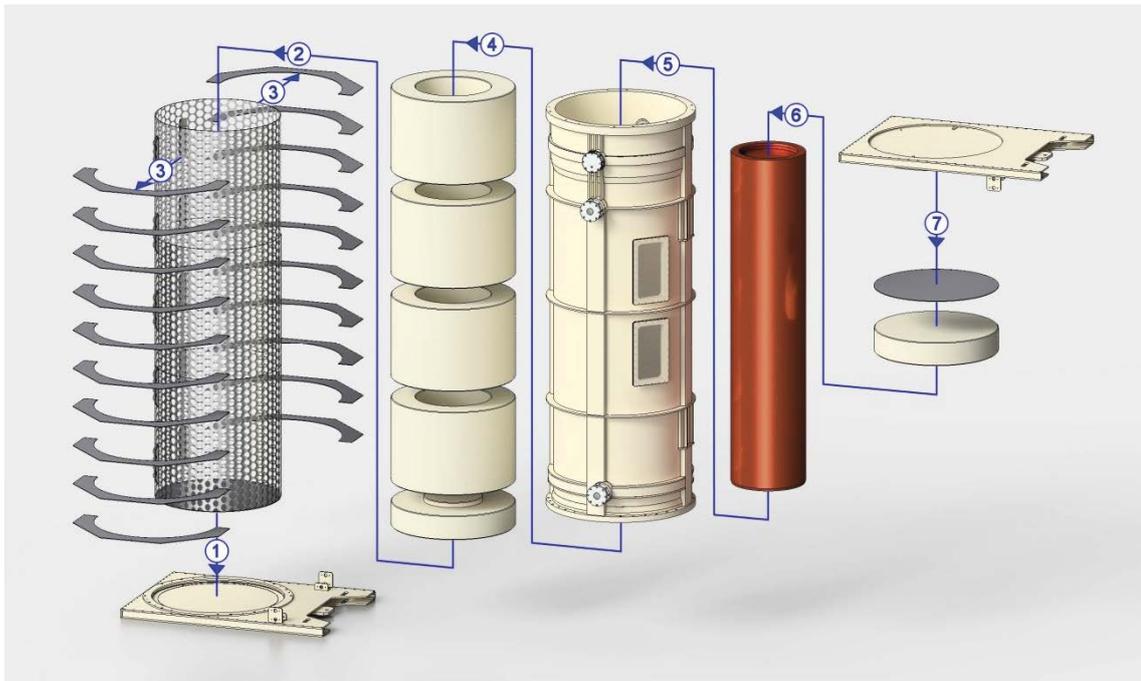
Illustration of the supercontainer assembly. The illustration is also showing the stiffening plates on the supercontainer shell that will be removed after installation of the buffer and before the transport tube is introduced.
